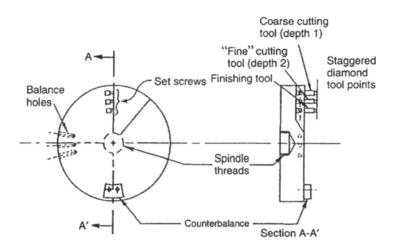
Schematic of a multiple fly cutter head with three diamond tools. (Adapted from Sanger. 3)
